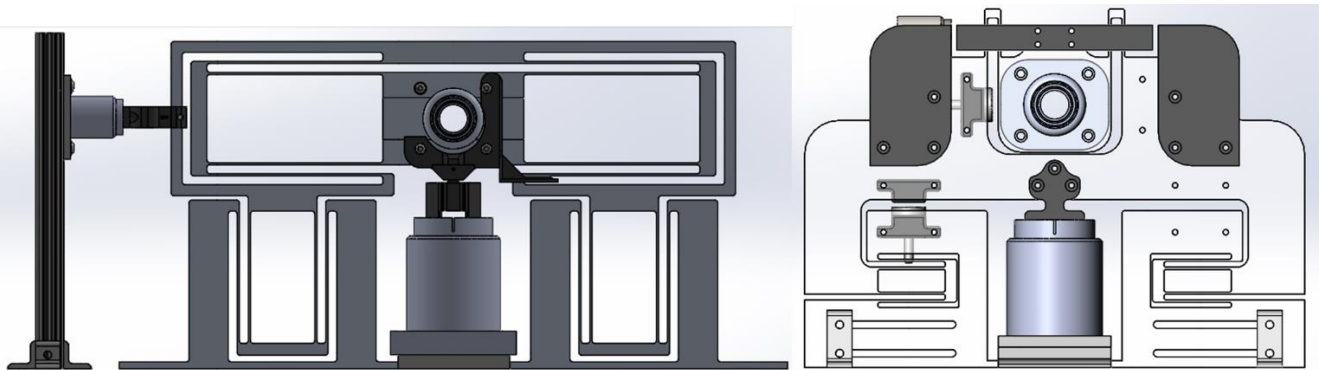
Same scale comparison between versions of printhead mechanism, including actuation and sensing components.
